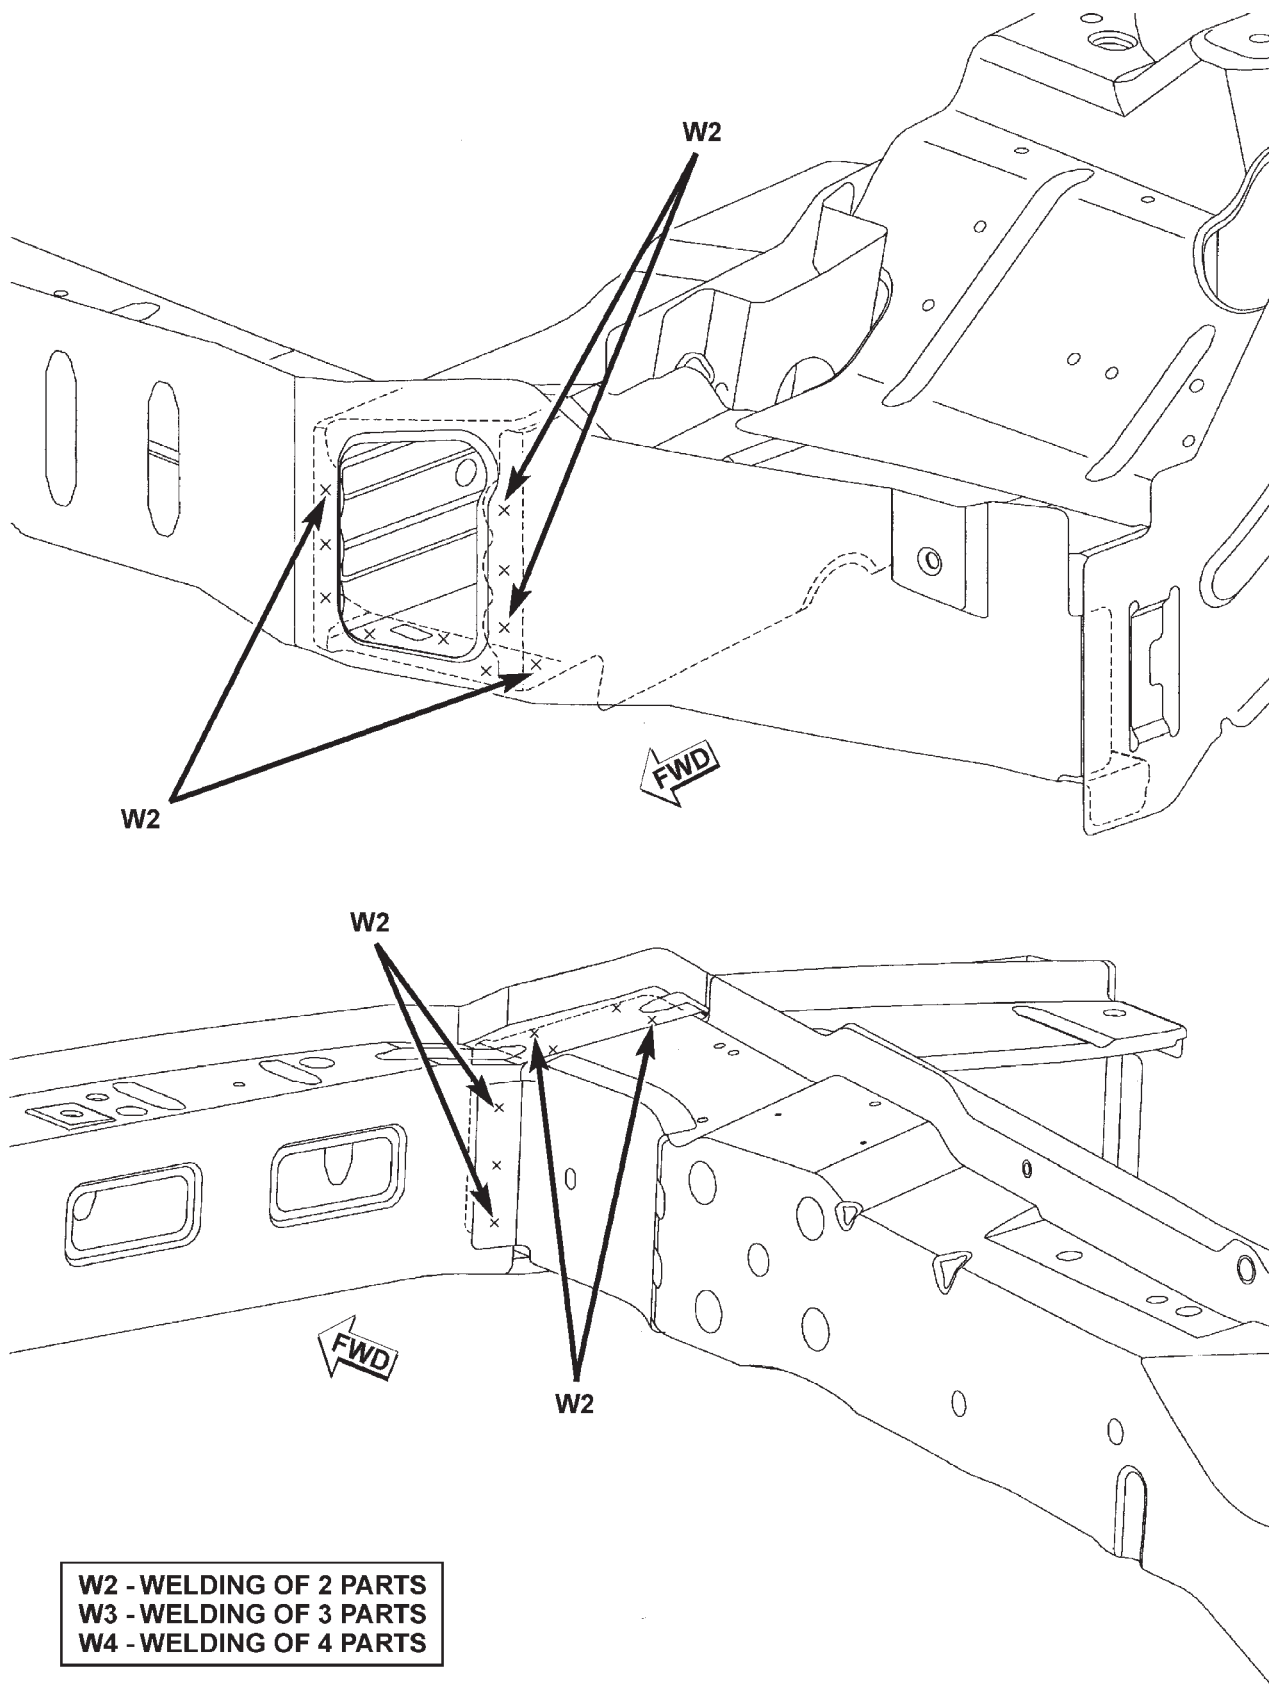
FRONT LOWER CROSSMEMBER TO COWL SIDE PANEL
